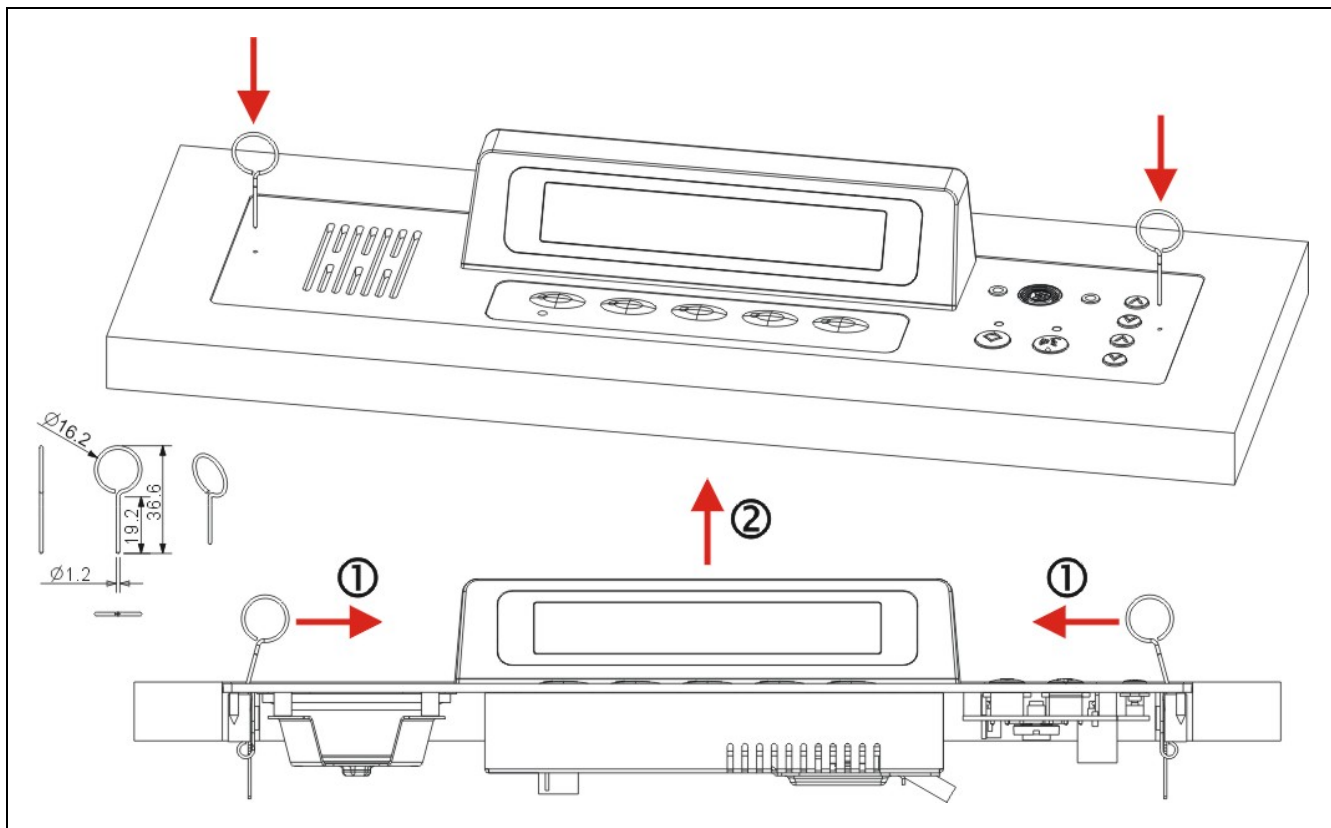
Disassembly of HCS-48U8 and HCS-48U9 series flush-mounted congress unit (method a)
